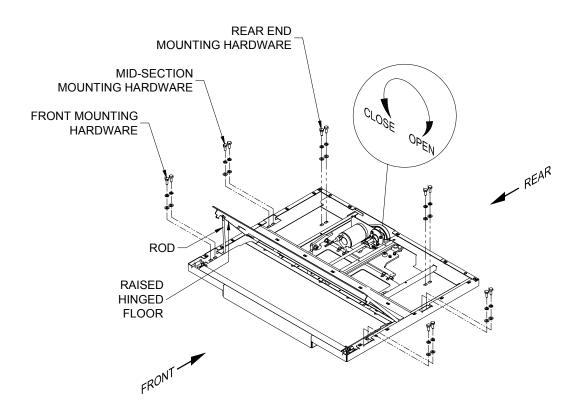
INSTALLING MOUNTING FASTENERS
